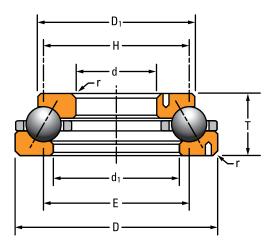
Type TVL angular contact thrust ball bearing assembly.
